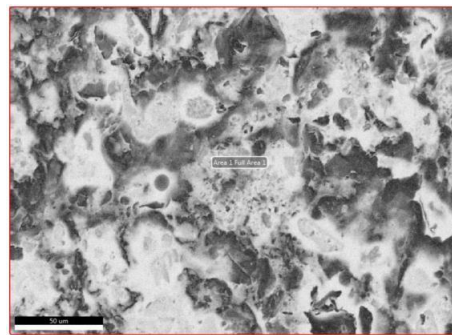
EDS analysis of inclusions on the surface of the power screw fracture on the crank mechanism of shaft
